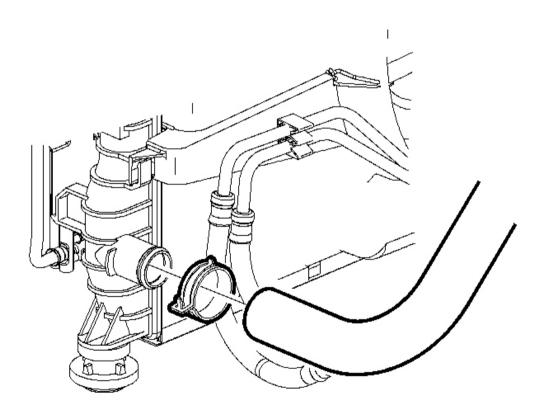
View Of Radiator Outlet (L61) Hose Clamp Courtesy of GENERAL MOTORS CORP.
